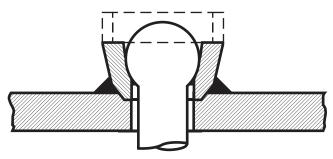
c HALF SLEEVE REPAIR PROCEDURE FOR DAMAGED BALL SOCKET FLEXIBLE STAYBOLT WELDED SLEEVE
